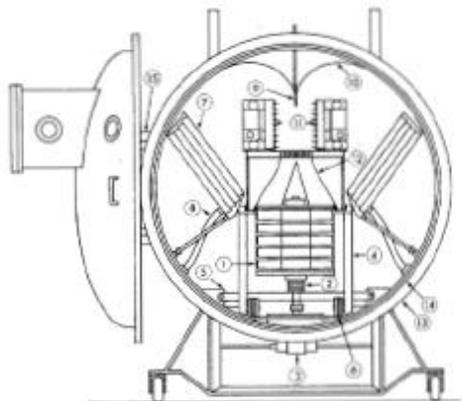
Schematic diagram of 30 kW PIE CW CO₂ laser. ① Axial flow compressors. ② Polyflex belt drive. ③ Hydraulic motor. ④ Compressor-array chassis. ⑤ Chassis tie pins. ⑥ Chassis roll out track. ⑦ Heat exchanger. ⑧ Water cooling lines. ⑨ Ceramic flow optiner. ⑩ Flow ducting. ⑪ Fluid-ballasted multielement electrodes. ⑫ Compressor flow transition. ⑬ Laser tank door flange. ⑭ O-ring vacuum seal. ⑮ Door hinge.
